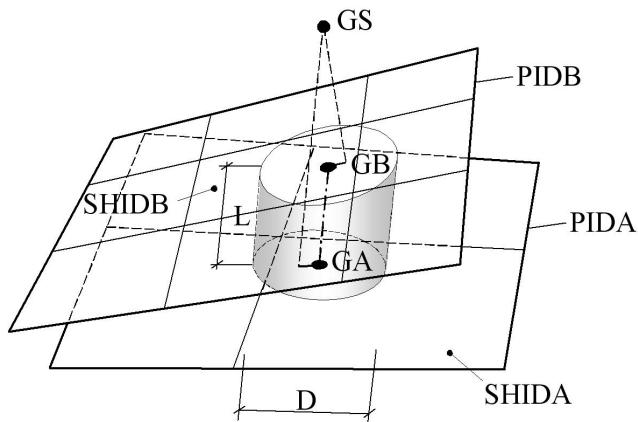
Spot Weld Covering a Patch of Elements
